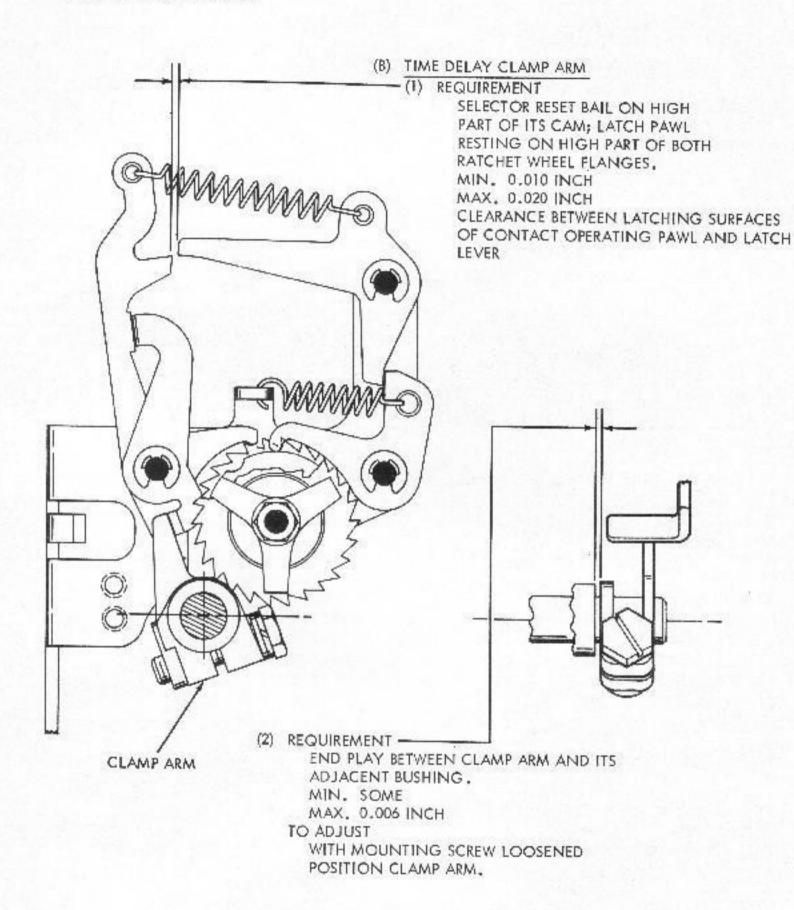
TIME DELAY MOTOR STOP MECHANISM
